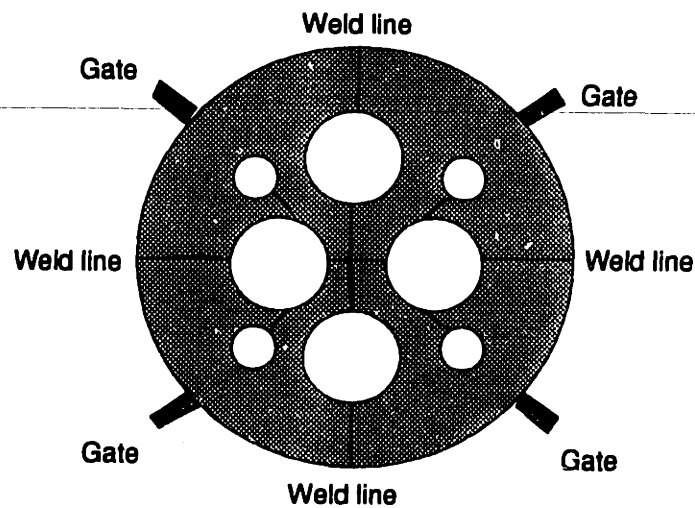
Injection molding with four gates exhibits weld lines
